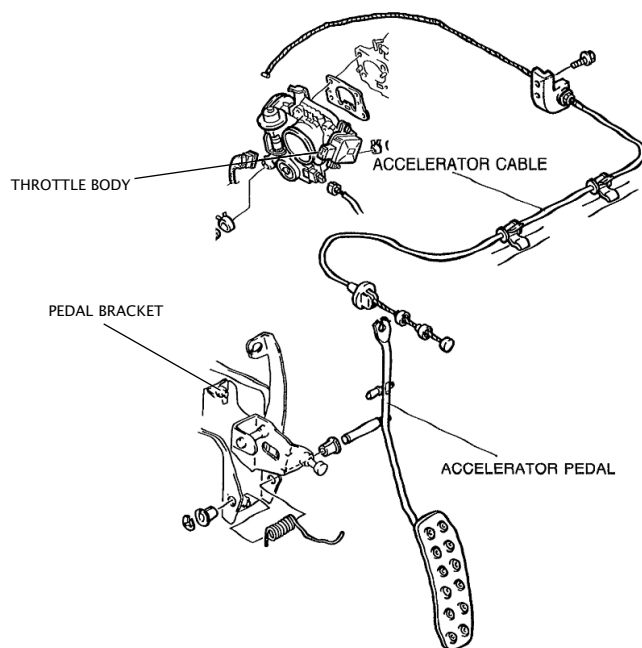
Standard throttle pedal arrangement (Mazda Motor Corporation 1989)
